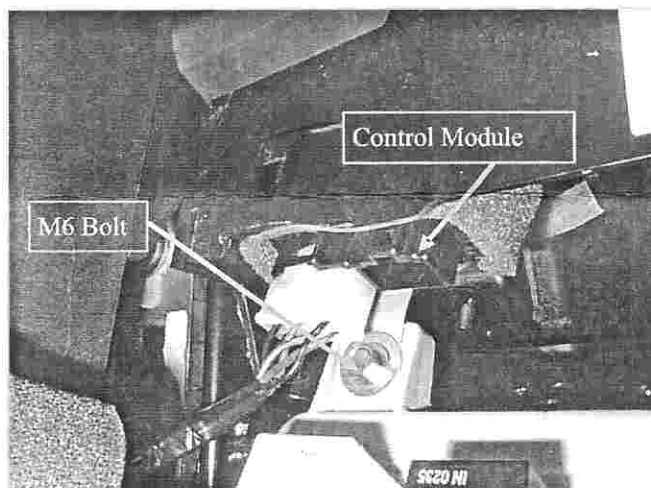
Control module attached to fuse panel mounting tab and 6 pin connector installed.
